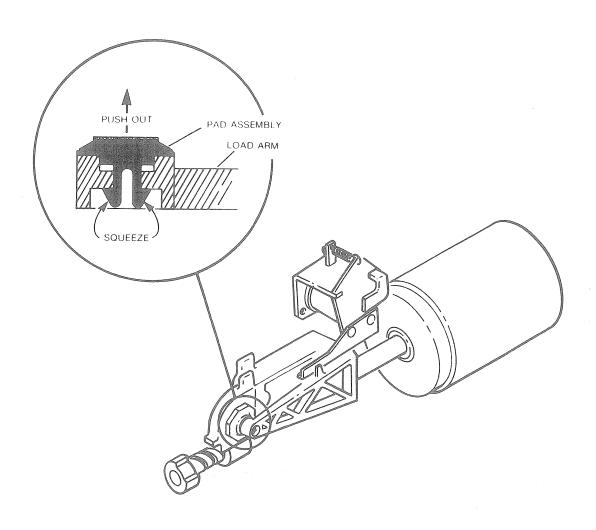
POP-OUT LOAD PAD REMOVAL
